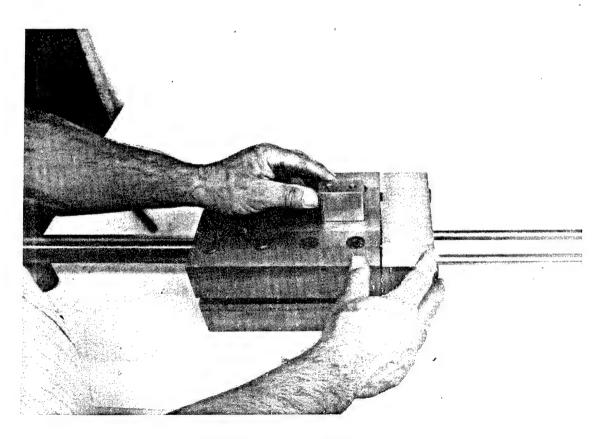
Final Inspection of Punch-to-die Cavity Before Pin-end Shaping
